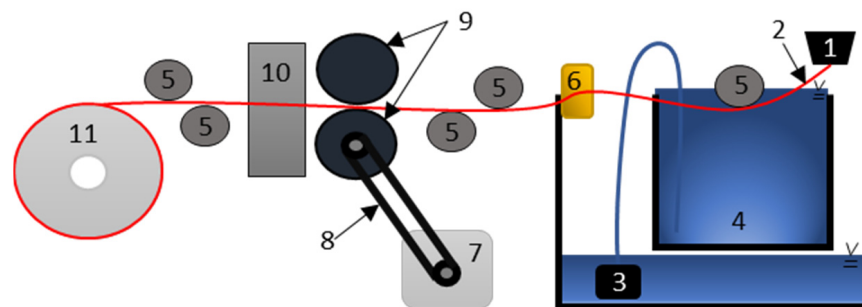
Schematic representation of the filament pulling machine. 1: nozzle of the single-screw extruder, 2: filament, 3: water pump, 4: water container, 5: guide wheel, 6: sponge, 7: stepper motor, 8: timing belt transmission, 9: PU rubber conveyor wheel, 10: laser measuring head, 11: filament spool.
